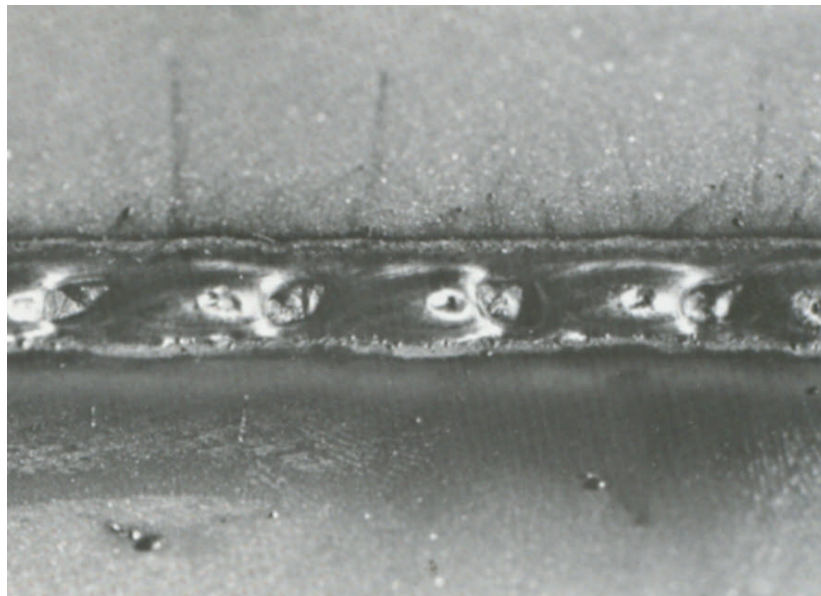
Weld Appearance for Classic Discontinuous Bead Humping in a GMAW-P Lap Joint (Paskell, 1989)
